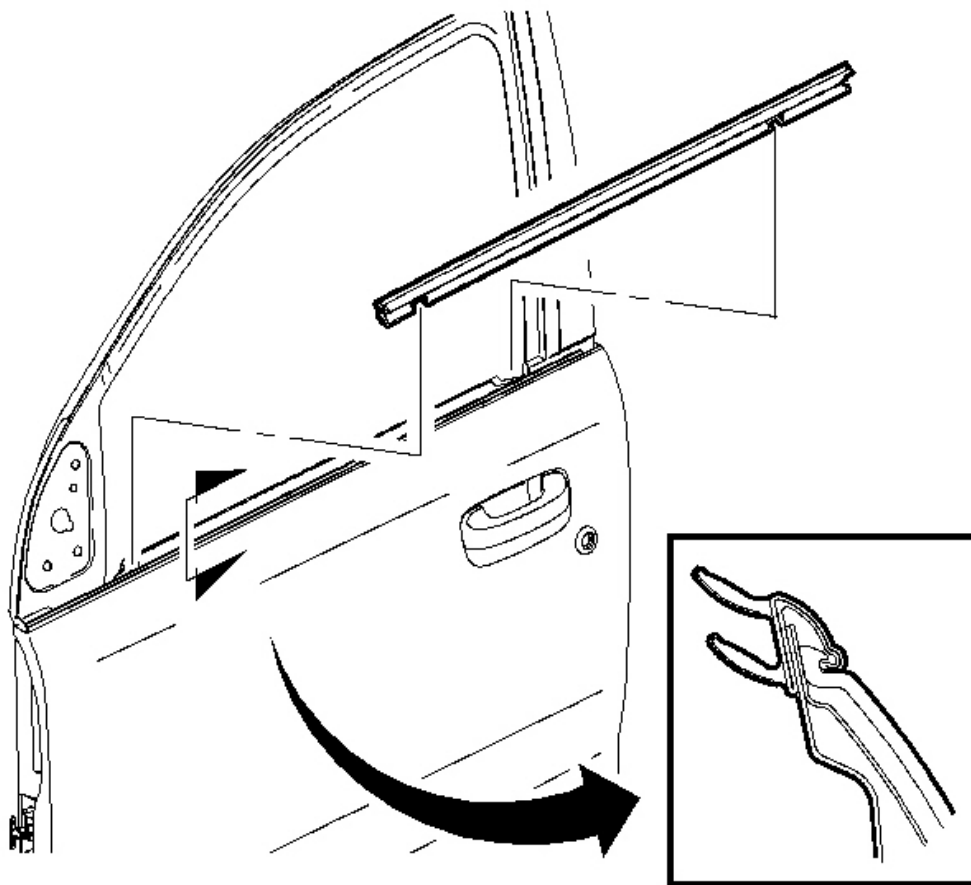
View Of Front Door Window Outer Belt Sealing Strip
